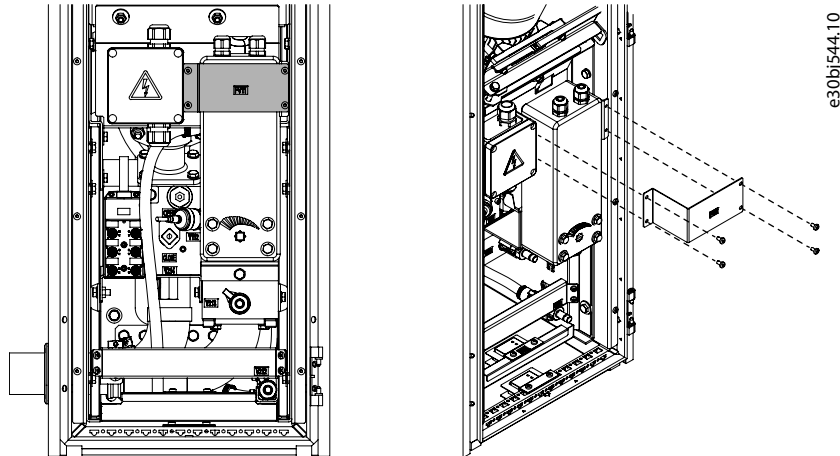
Removing the Mounting Plate of the Valve Actuator
